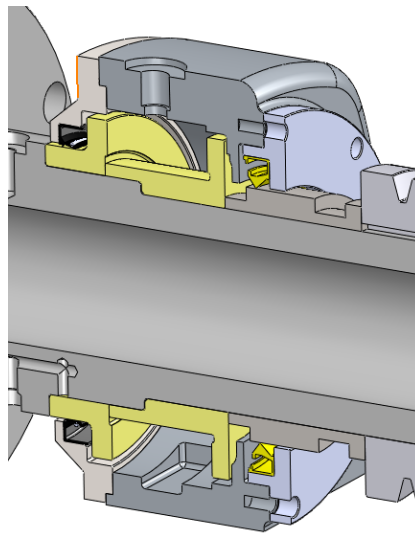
Assembled bearing – solids end, with bearing bush and dowel removed
